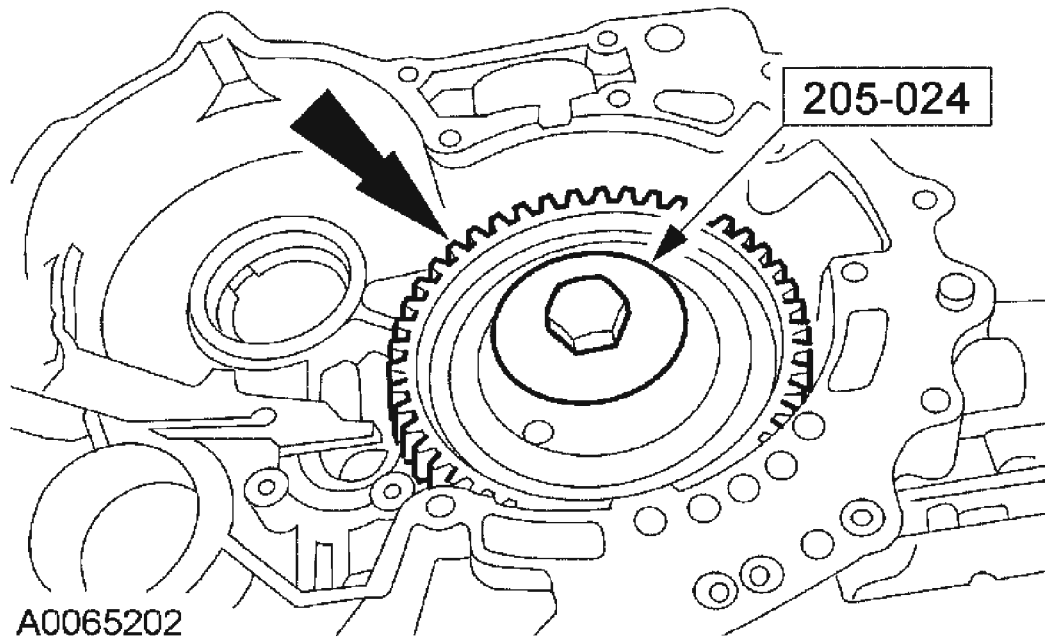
Positioning Final Drive Input Gear Using Special Tool
